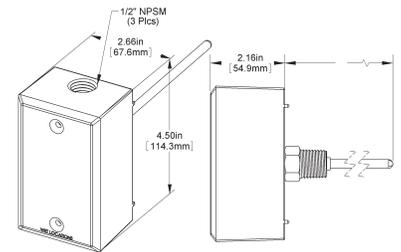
Double Threaded Immersion Sensor in a Weatherproof (WP) Enclosure
